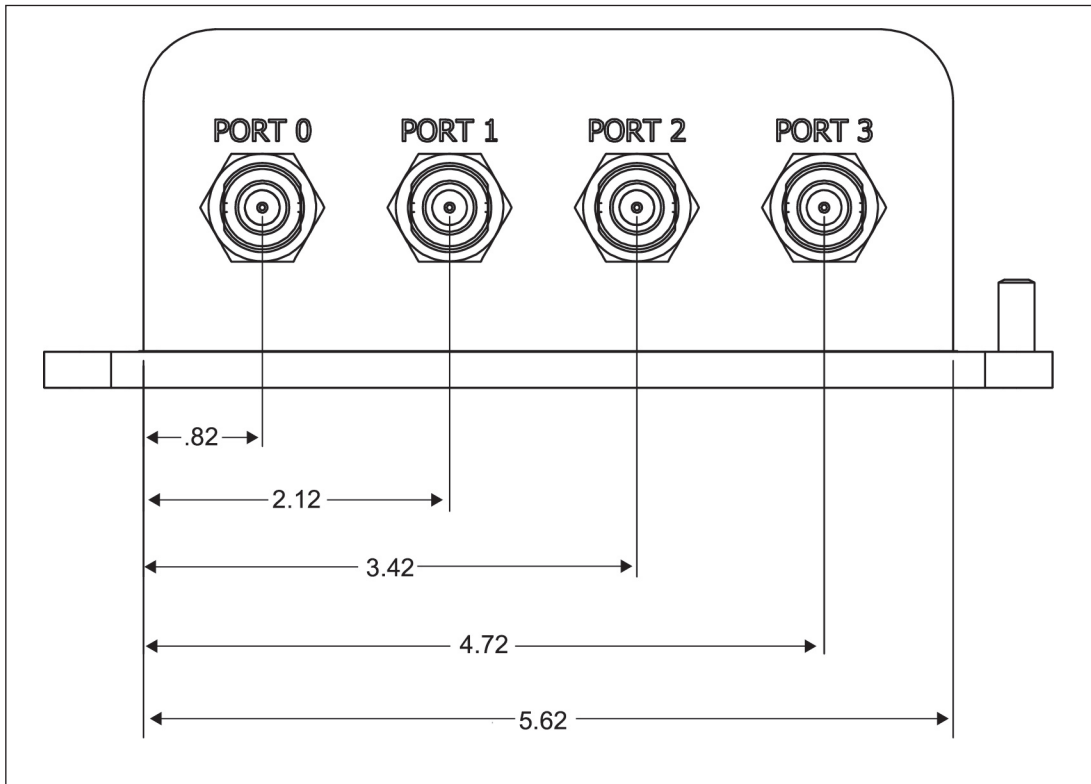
MPRX End Panel Dimensions with Antenna Ports
